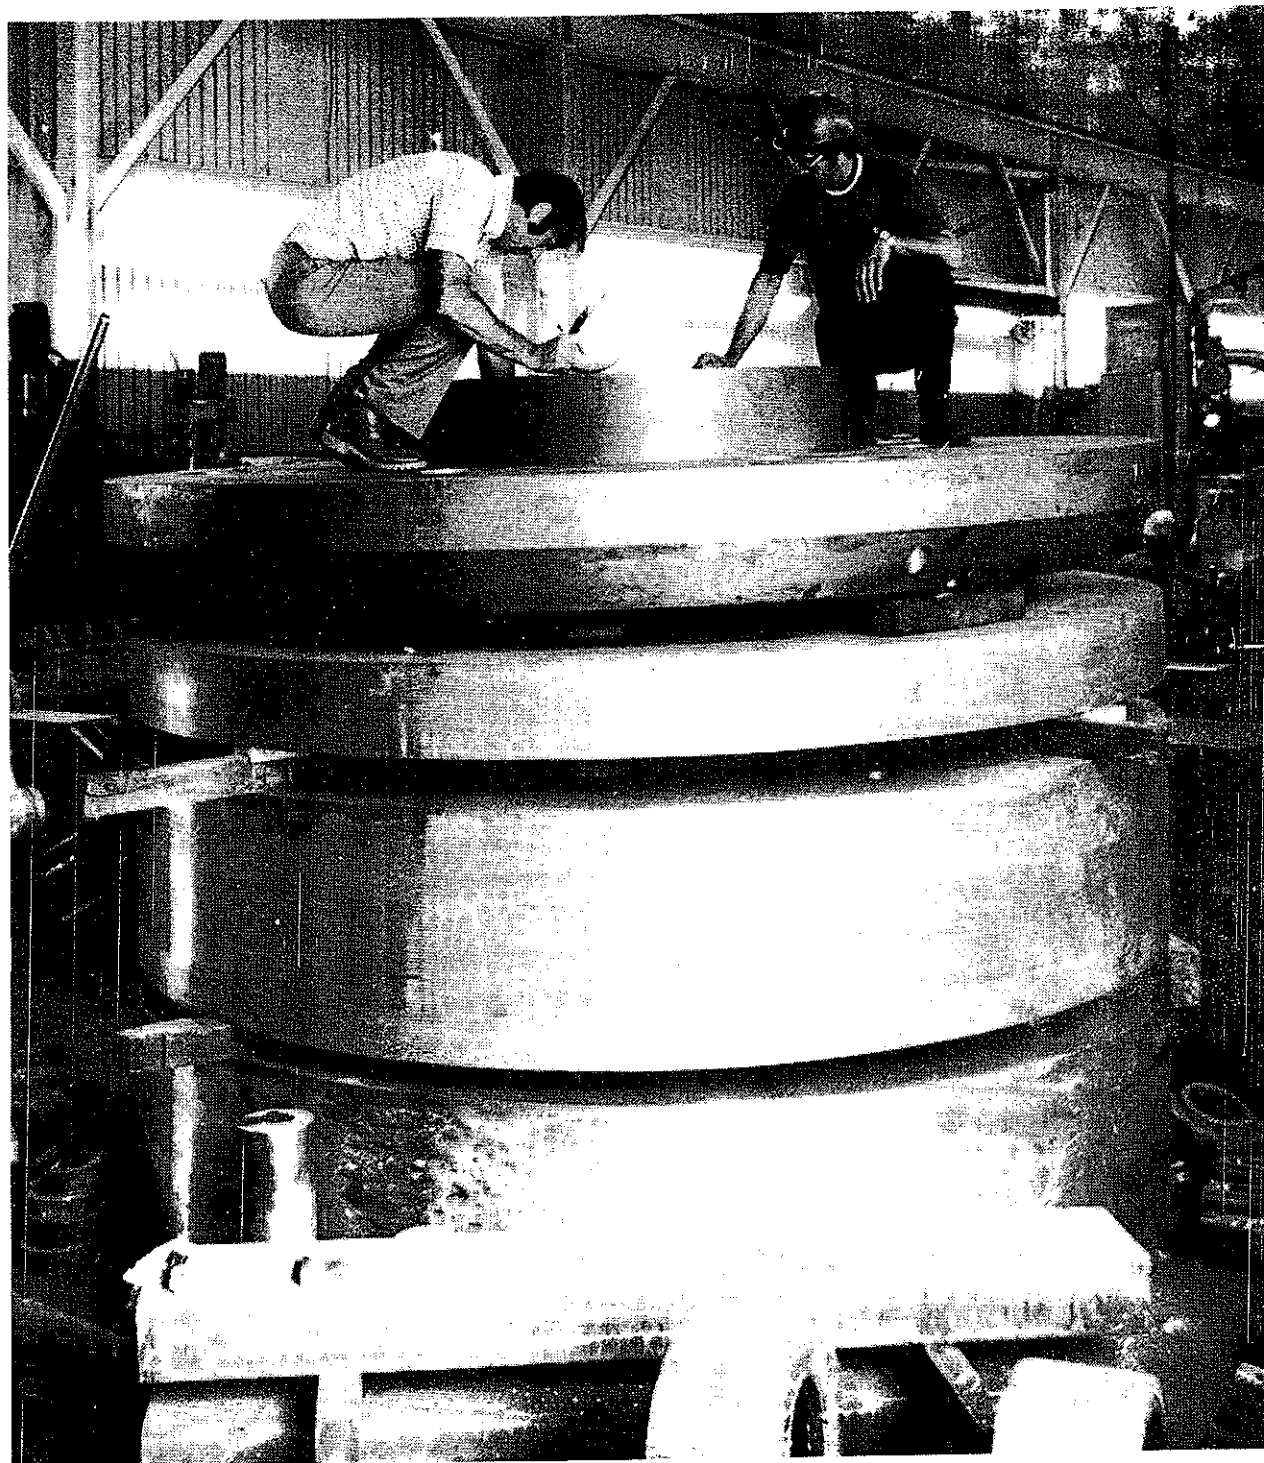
(IV.1).--Photograph of the magnet yoke stacked in the fabricator's shop awaiting final assembly. The yoke is ten feet in overall diameter, weighs approximately 90 tons (total for five pieces) and is fabricated from cast 1020 steel. Magnetic tests of samples taken from the castings indicate excellent magnetic uniformity. Ultrasonic tests indicate that the castings are free from voids.
